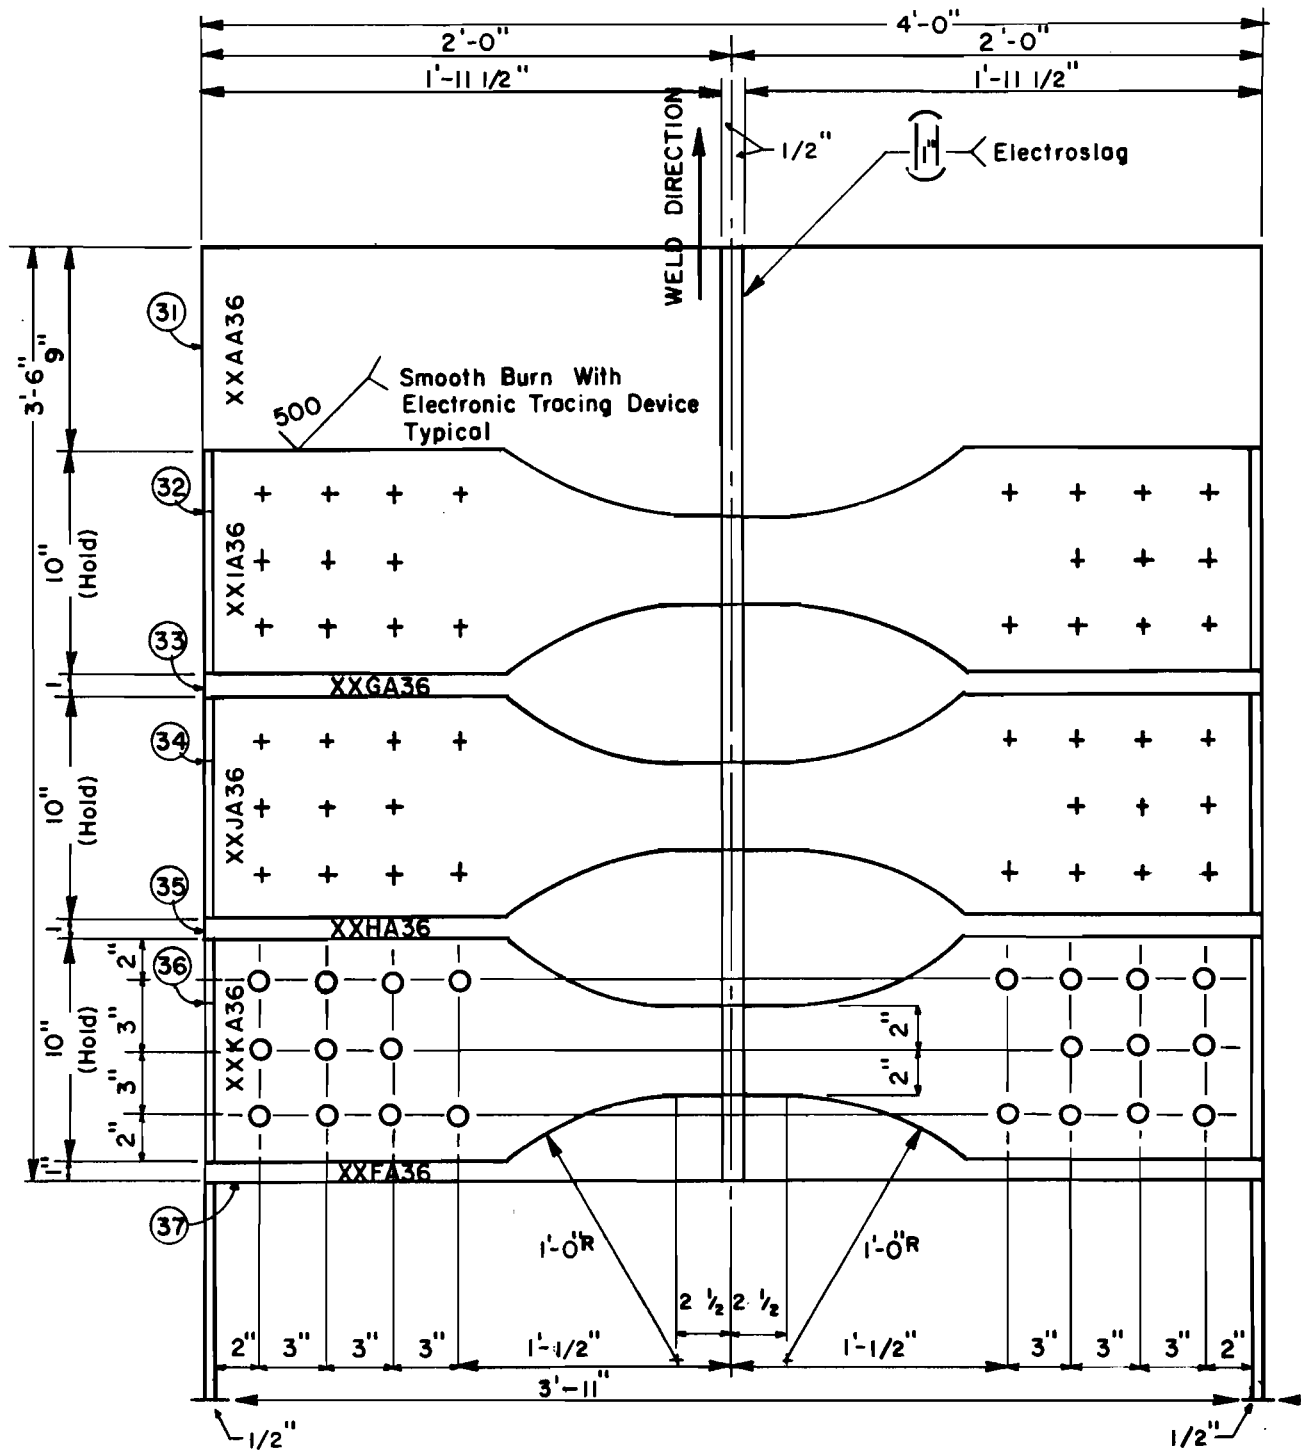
The pattern for cutting the full-size specimens from the welded plates.
